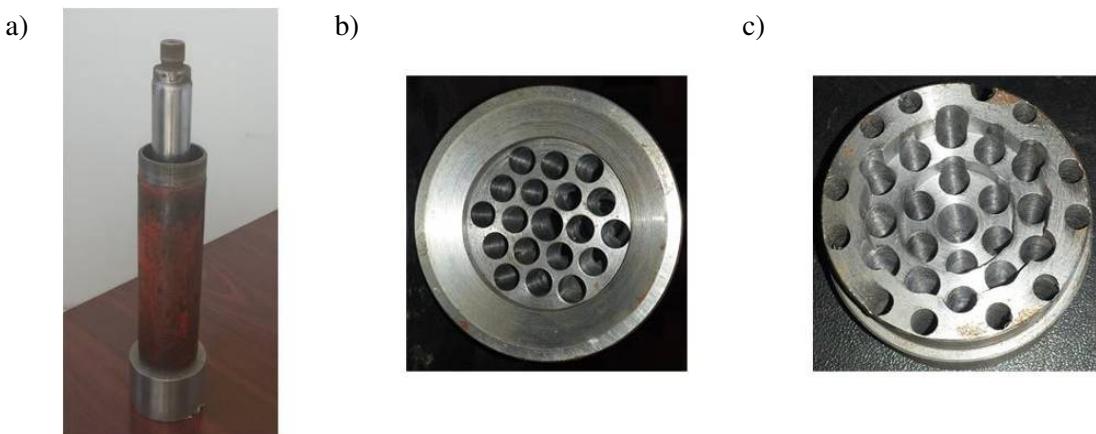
Device for compressing biomass at low scale: a – device ready to be fitted to the force machine; b – 6 mm die; c – 8 mm die
